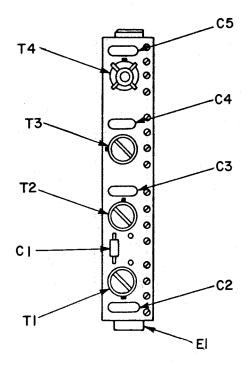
28 MHz Subassembly A2A4A18, Component Locations
